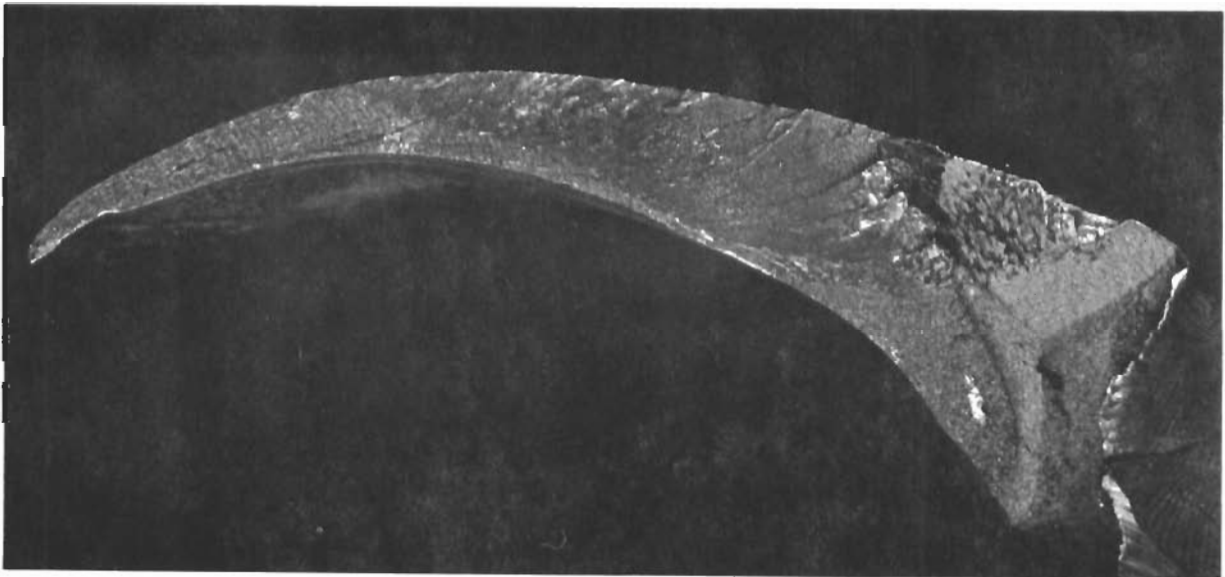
Fatigue Failure in Blade of Stationary Gas Turbine. Failure Started on Convex Side Near Tip.
